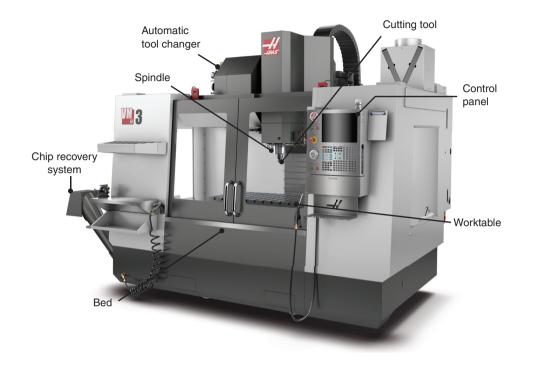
A vertical-spindle machining center. The tool changer is on the left of the machine, and has a 40 tool magazine. *Source:* Courtesy of Haas Automation, Inc.
